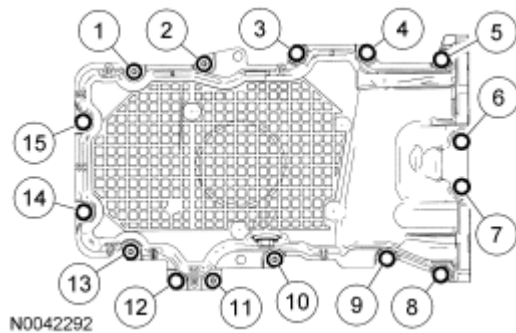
Identifying Tightening Sequence Of Oil Pan-To-Engine Bolts
